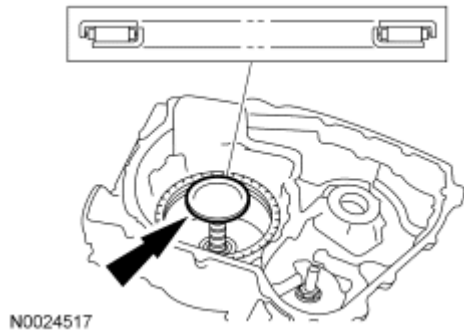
Locating No. 1 Pump Support Thrust Bearing Assembly
